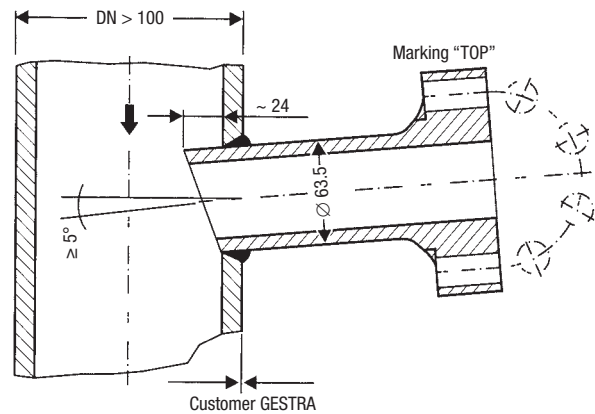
Welding of standpipe to pipes (tee pieces) DN > 100
